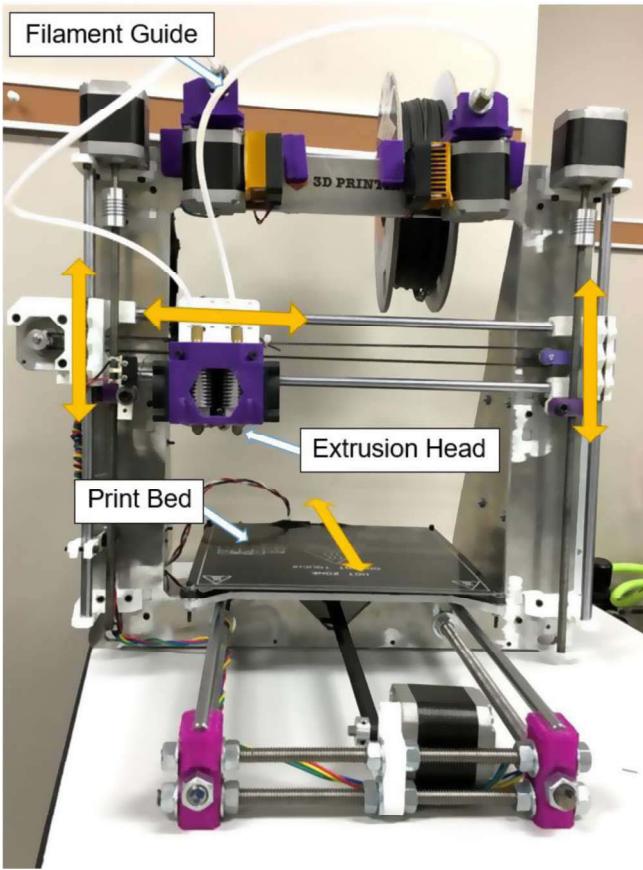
Customized gMax 3D printer that is utilized to 3D print the transformer cores. Various components of the printer are shown; including the filament guide, extrusion head, print bed, and the x-y-z axes of motion of the stepper motors.
